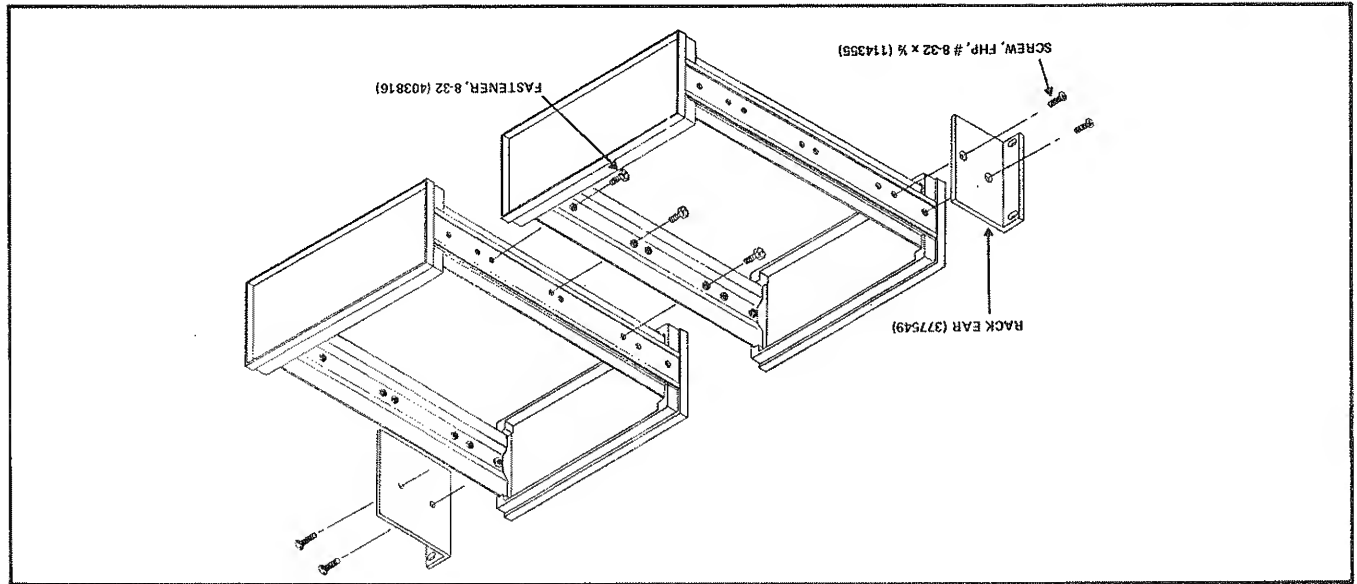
SIDE-BY-SIDE RACK MOUNTING
